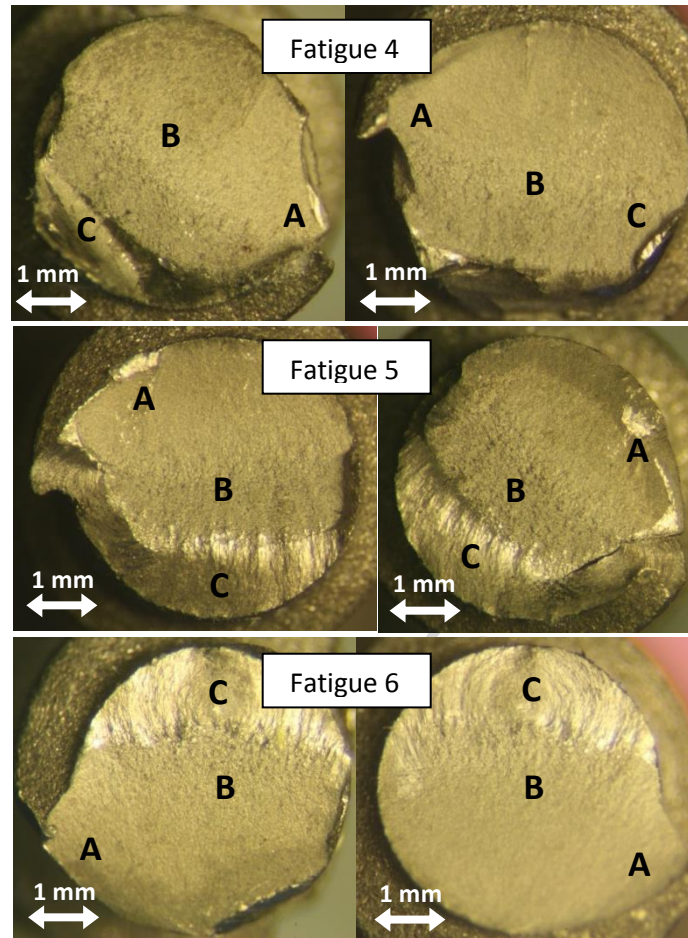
Stereo microscope images (10X) of the pedicle screw fracture surfaces occurring in fatigue 4 (-80, -200 N and 56,410 cycles); fatigue 5 (-120, -200 N and 234,288 cycles); and fatigue 6 (-110, -190 N and 950,341 cycles). The standard fatigue fracture areas are marked as: (A) crack initiation, (B) crack propagation and (C) brittle fracture.
